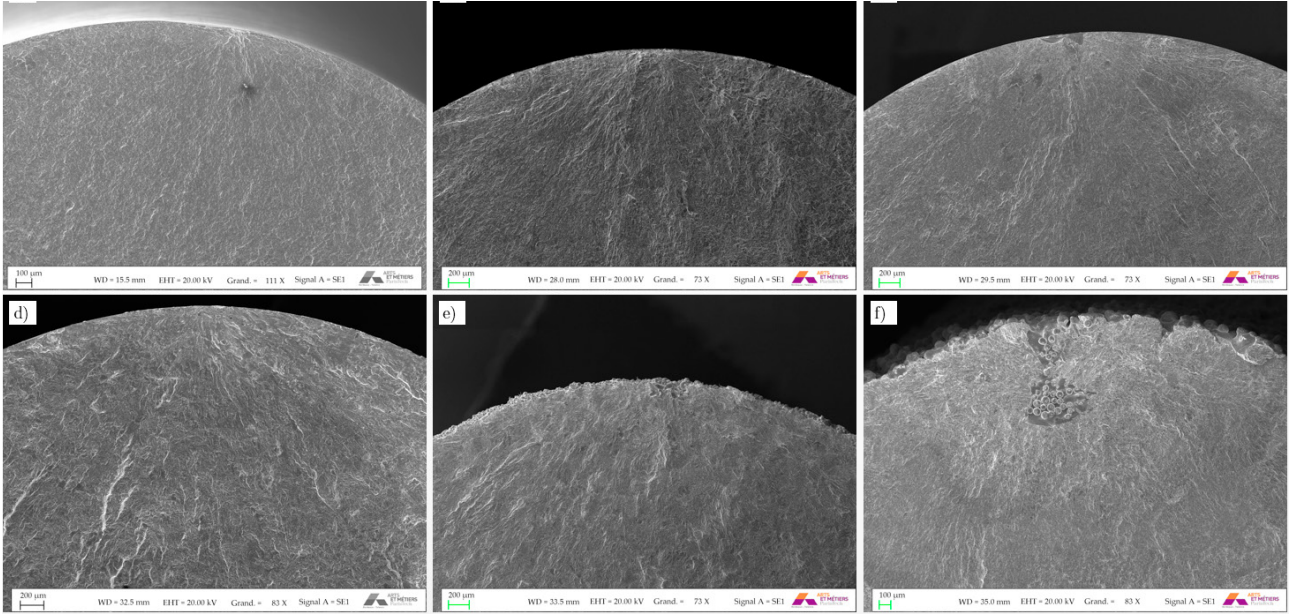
Typical initiation site for each set of specimens: (a) HR; (b) EBM machined no remaining defect; (c) EBM machined with a remaining defect; (d) SLM machine; (e) SLM As-built; (f) EBM As-built.
